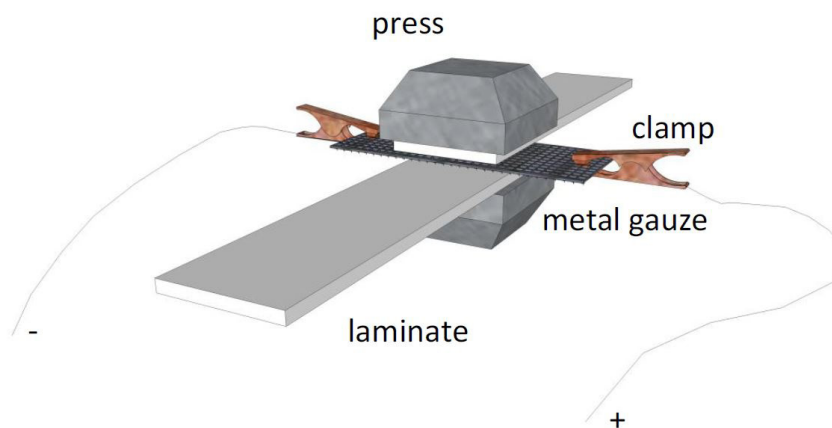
Welding of two FRP laminates [Nijssen, 2015]
